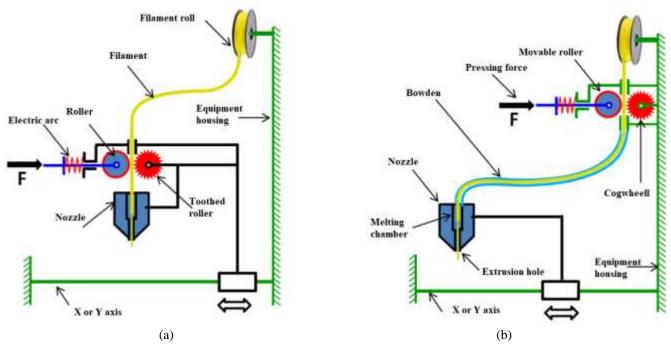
Basic diagram of FDM3D printer extruder: (a) direct extruder, (b) bowden extruder, [18]
